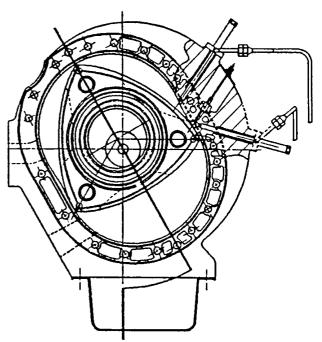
Cross section of Rotary engine showing trochoid shaped rotor housing and triangular shaped rotor.
